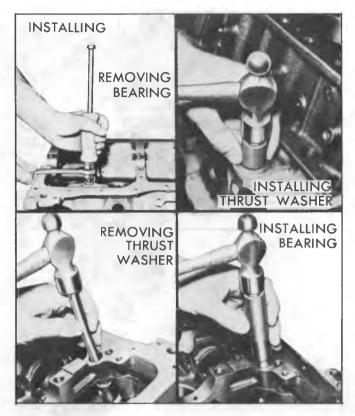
Replacing Distributor Bearing and Thrust Washer
